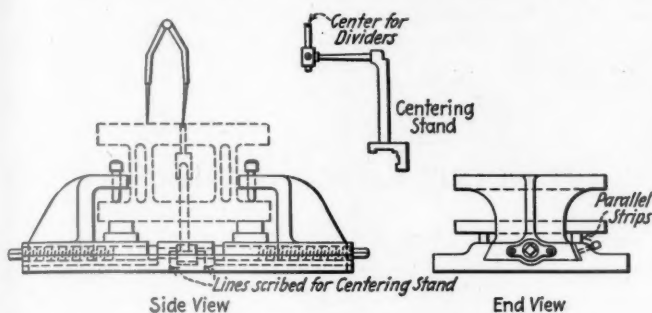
Boring Mill Chuck for Holding Driving Boxes
